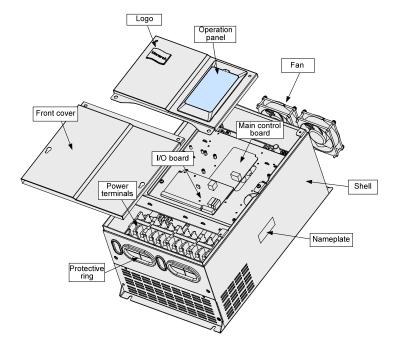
Exploded view of the sheet metal structure (18.5–30 kW)
